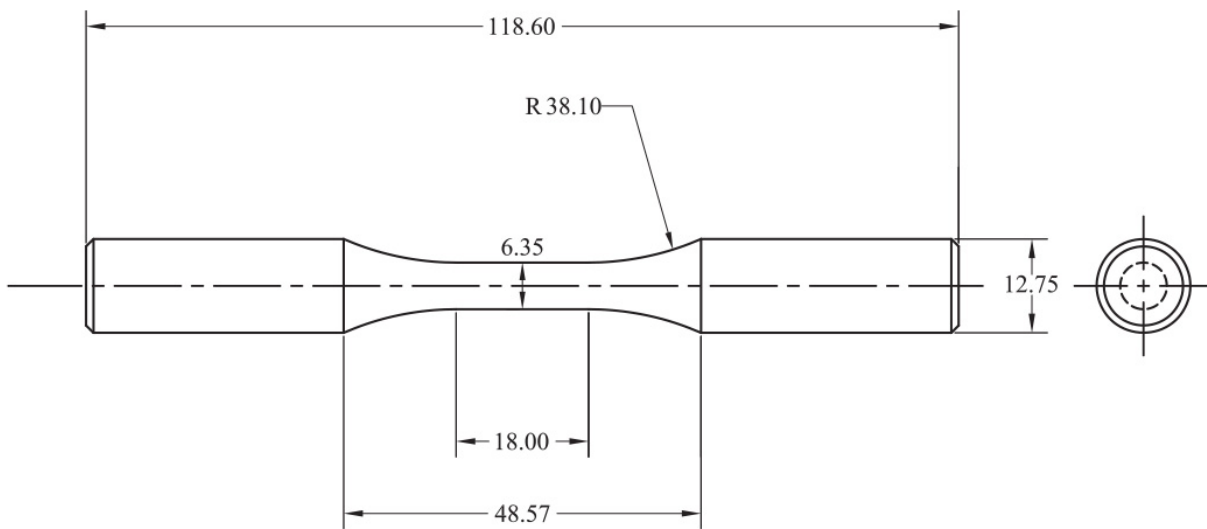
Dimensions and configuration of uniaxial fatigue specimens, designed per ASTM standard E606. All dimensions in mm.
